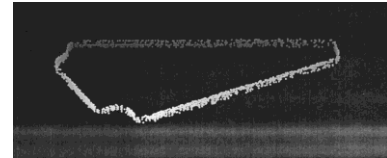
SHOCK PLATE: SEGMENTED SENSED 3-D POSITION POINTS ASSOCIATED WITH USER SKETCH OF INTERIOR POCKET.
